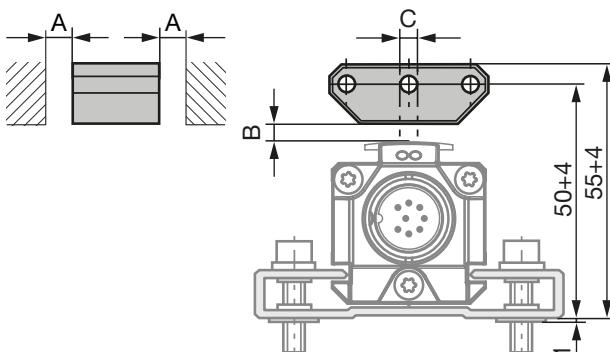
Dimensions and distances with BTL5-P-3800-2 magnet
